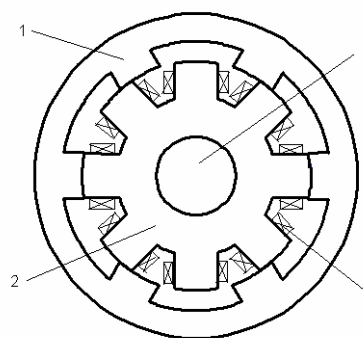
Construct of in-wheel SRM (1-rotor; 2-stator; 3-shaft; 4-winding)
